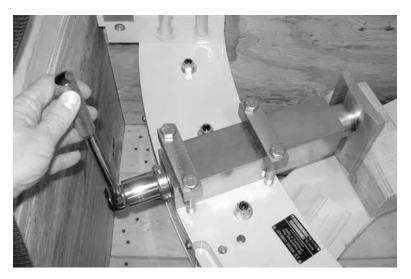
Turn the leg adjustment screw to clamp the legs on the workpiece.
